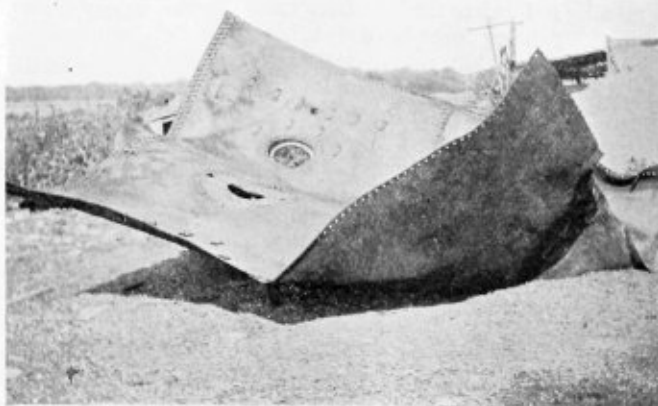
View of Shell Plates, Showing Patch and Extent of Crack
